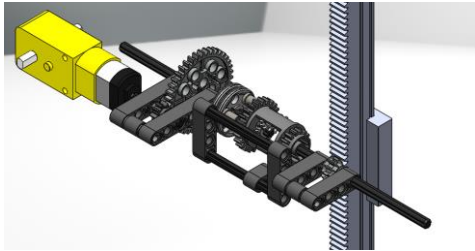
CAD of the gear train with a new rack, ratchet and a motor.
